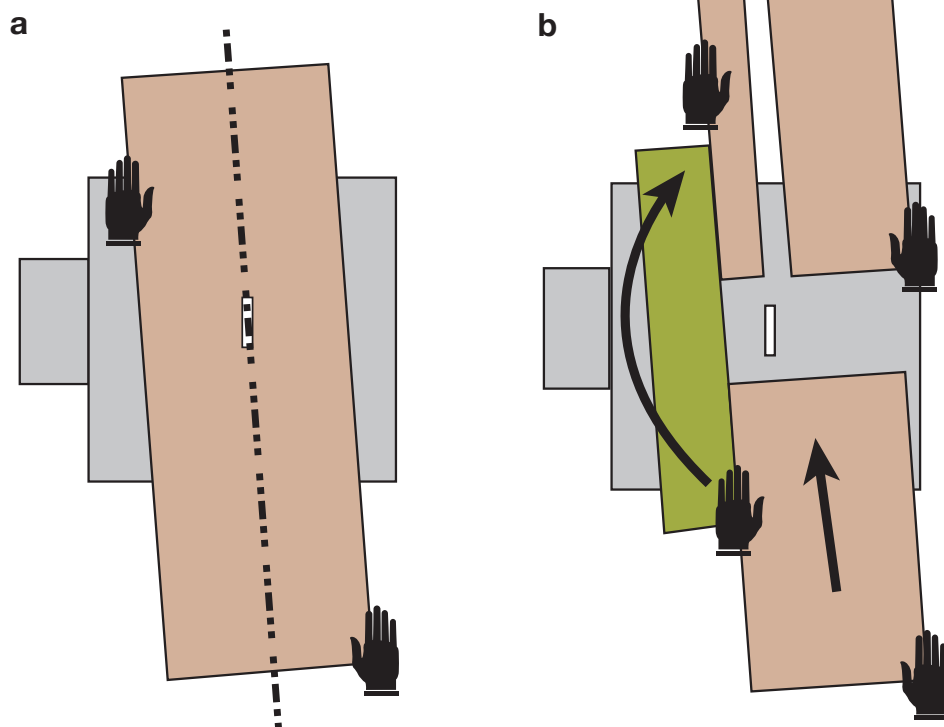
(a) The operator's hands are placed correctly to avoid the danger zone. (b) If cutting a long board, the cut can begin with hands placed as shown in the lower portion of this illustration. As the cut proceeds, move your left hand to the back side of the blade, as shown on the top of this illustration.
